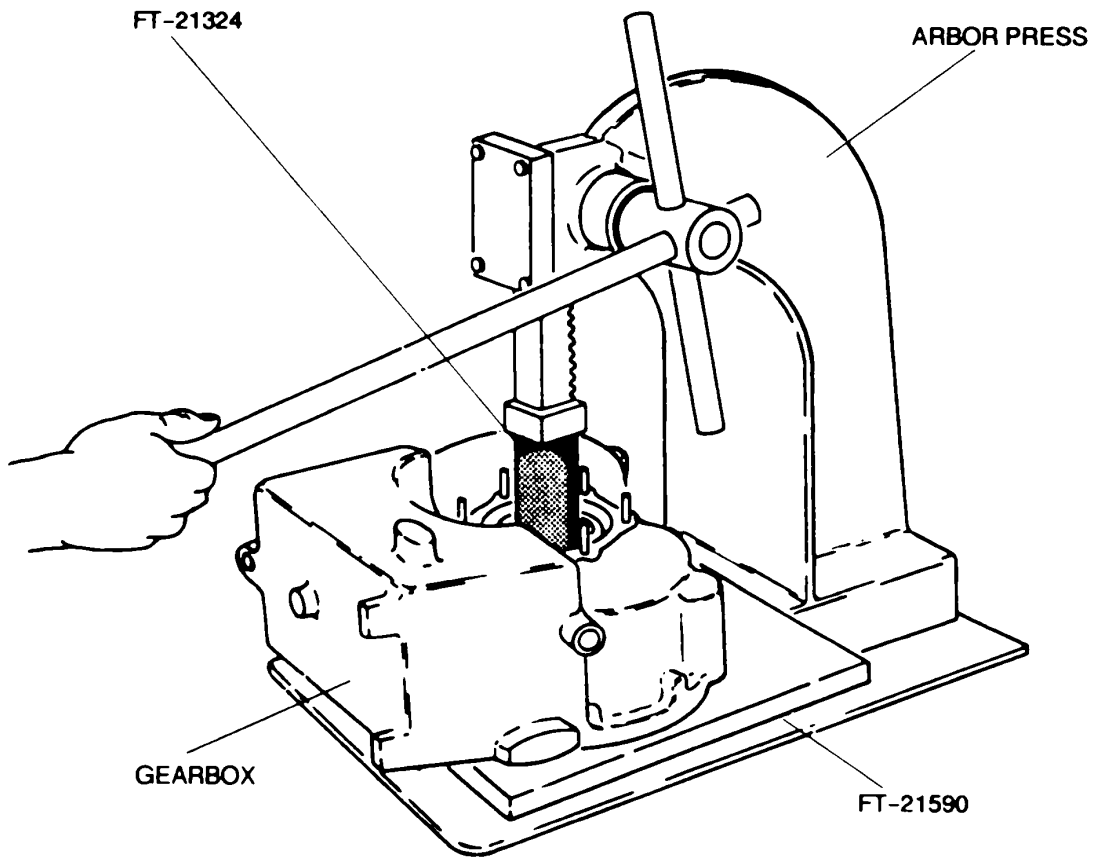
Installing Generator Shouldered Shaft Using Fabricated Tools FT-21590 and FT-21324
